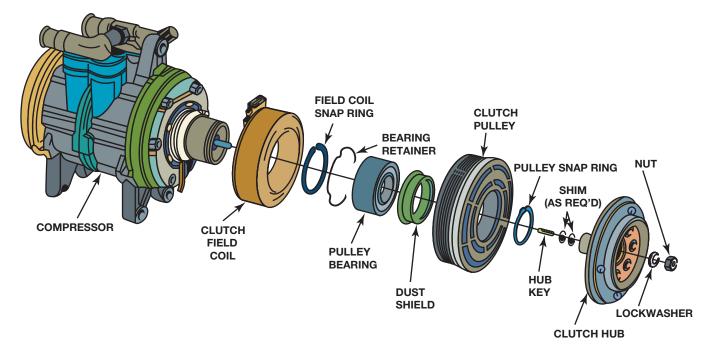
The electromagnetic clutch assembly includes the clutch field coil, where the magnetic field is created; the clutch pulley, which rides on the pulley bearing; and the clutch hub, which is attached to the input shaft of the compressor. The small shims are added or deleted as needed to adjust the air gap between the clutch hub and the clutch pulley.
